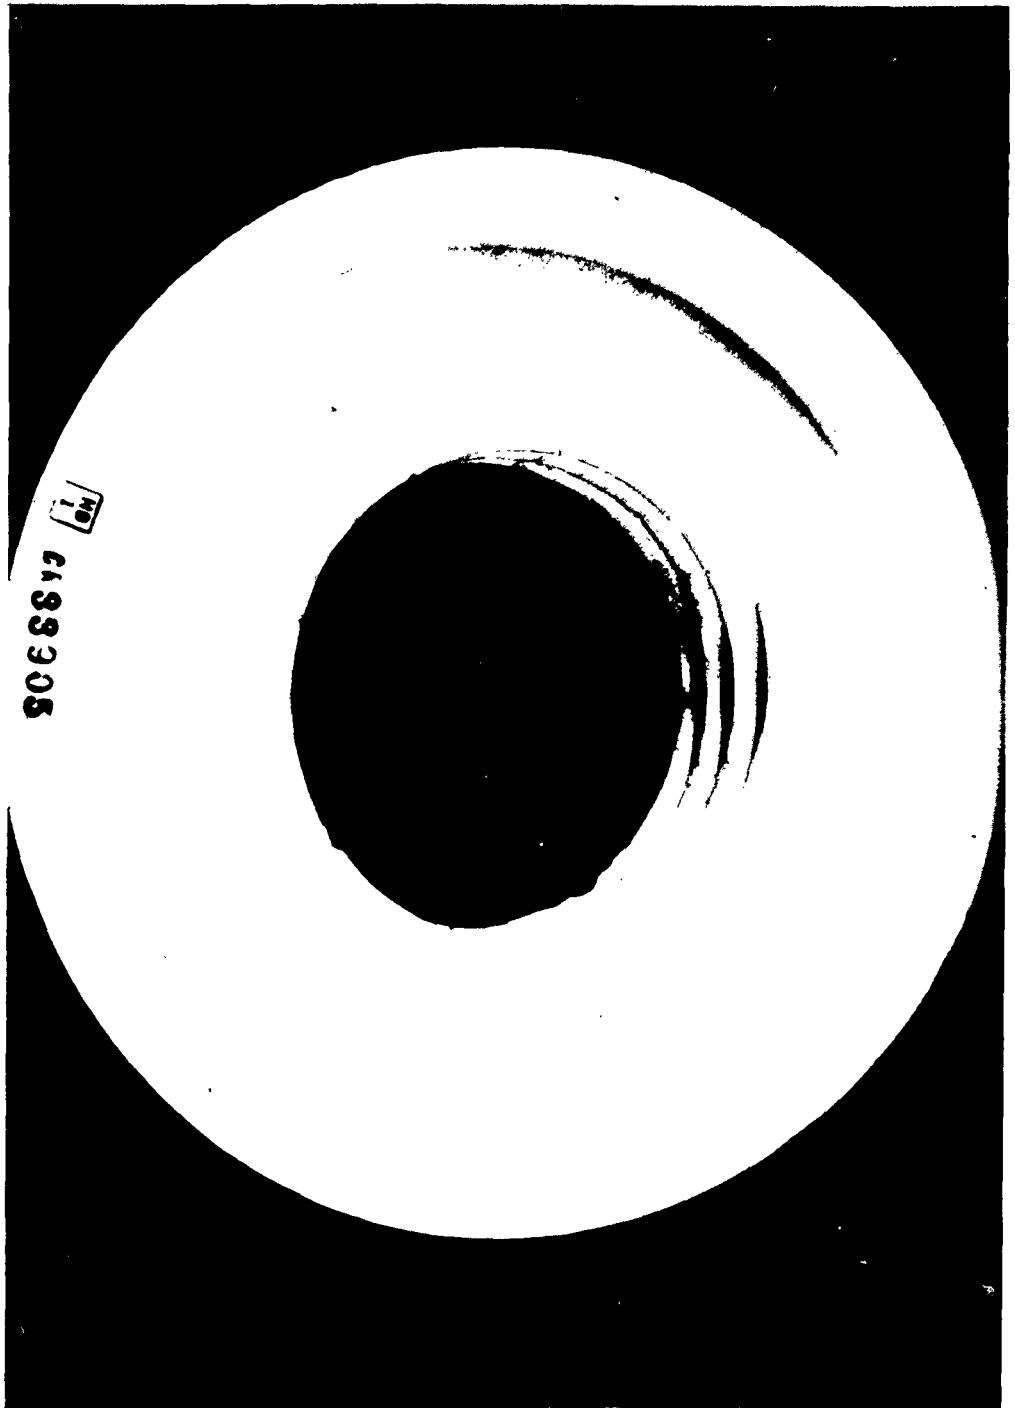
Nozzle Closure - M51 Rocket Motor.
